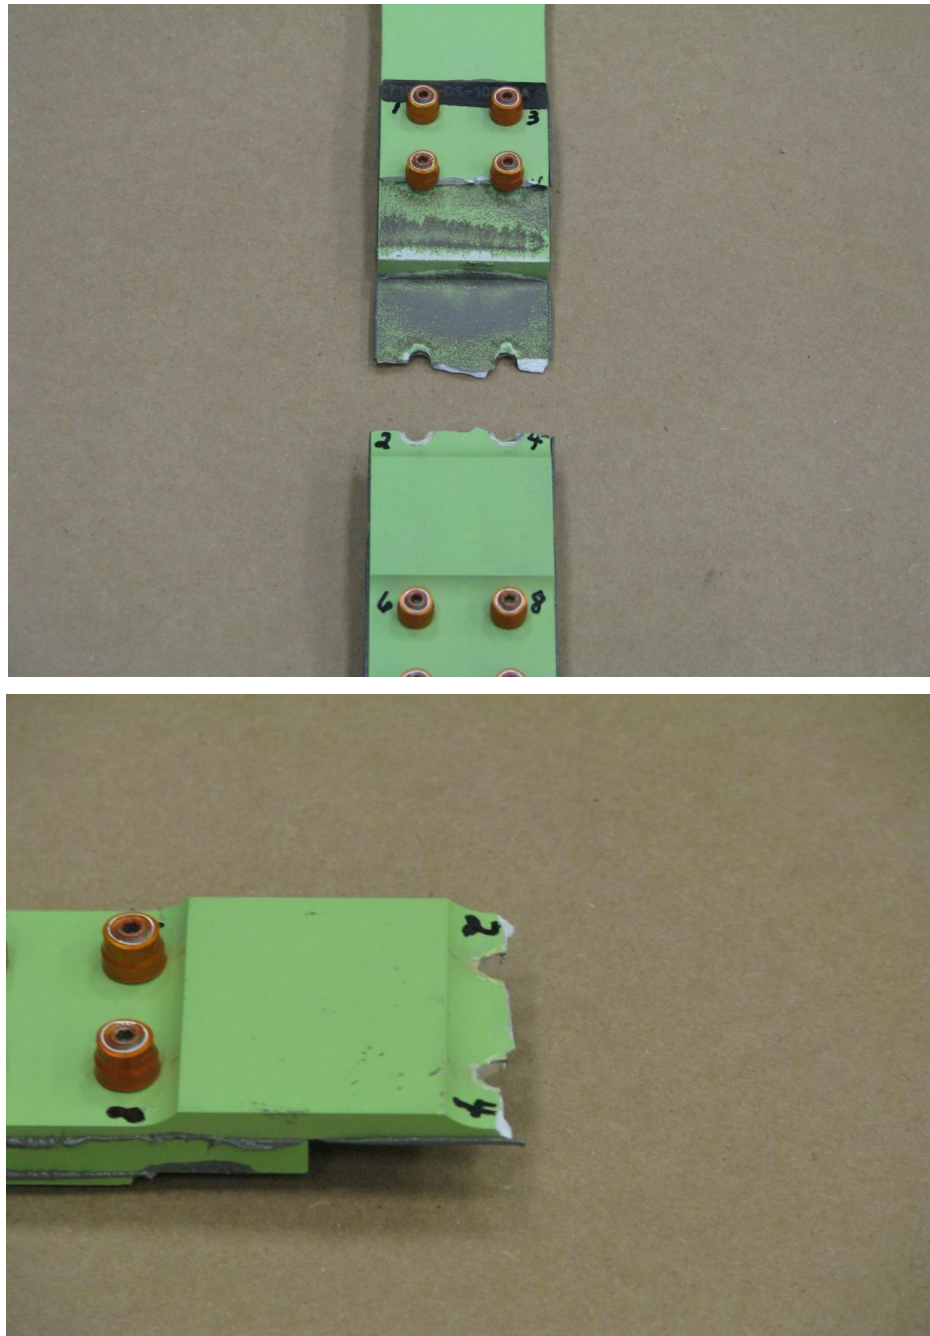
8 Fastener Double Shear Typical Failure
